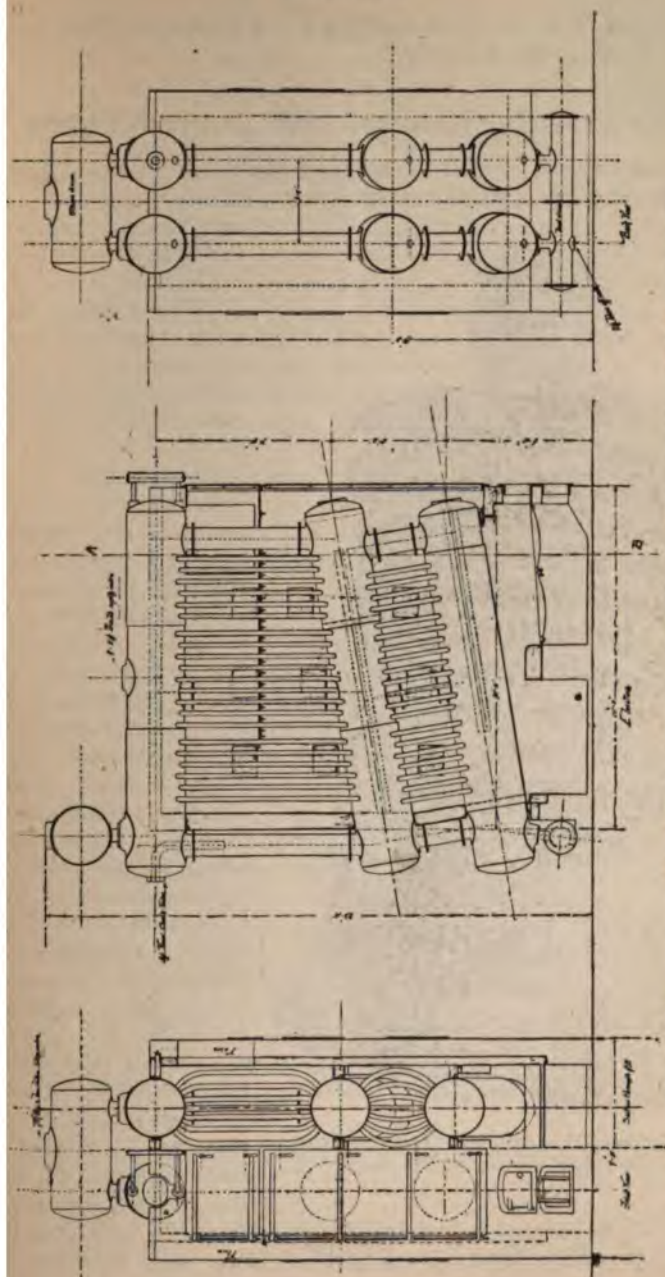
Transverse and Longitudinal Sectional Drawings of the "Suckling" Water-tube Boiler.
